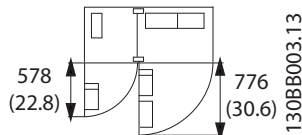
Space in front of IP21/IP54 enclosure type, frame size F1
